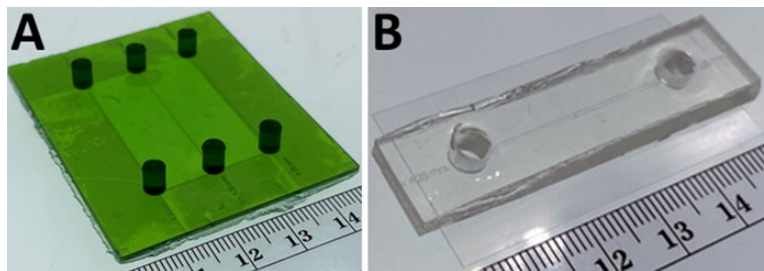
(A) 3D-printed plastic master mold for the channel modules. (B) Fabricated PDMS channel module.
